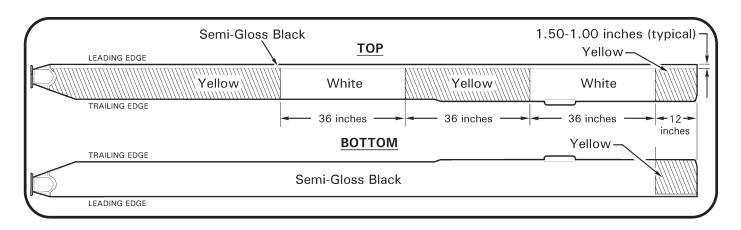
C016-7 MAIN ROTOR BLADE PAINT SCHEME
